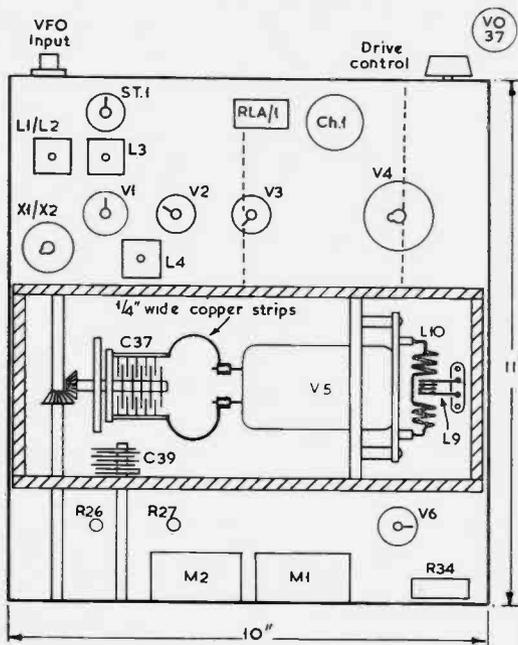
The above-chassis layout of the G3NNK transmitter. The xtal mount is a ceramic octal v/holder using alternate sockets. The PA anode coil L11 and L12 — see Fig. 1 — have been omitted for clarity.
